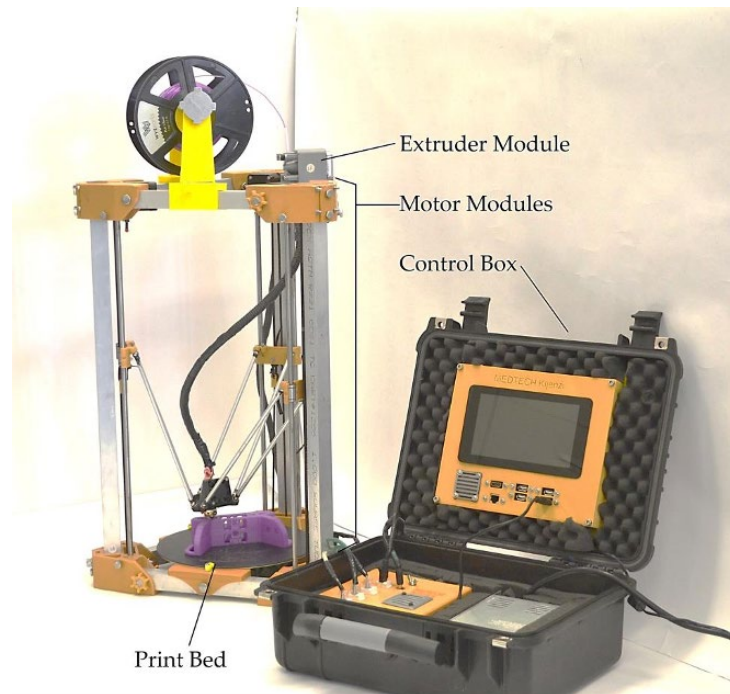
Kijenzi 3D Printer Assembled Control Box and Printer Bed.
